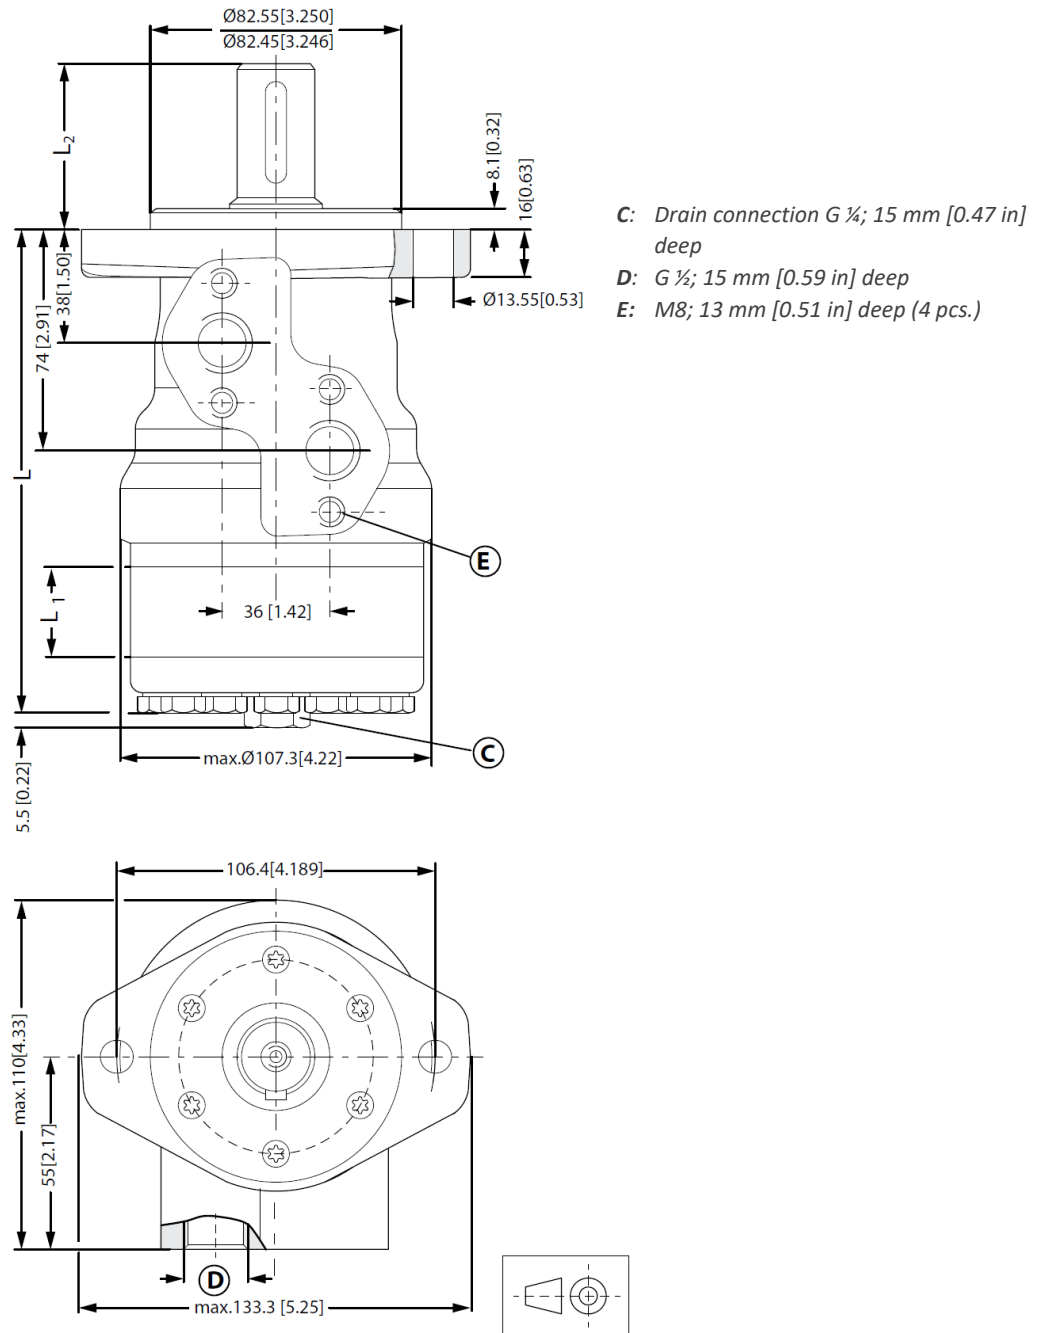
OMR, OMR C and OMR N Side port version with A2 flange (EU version)
